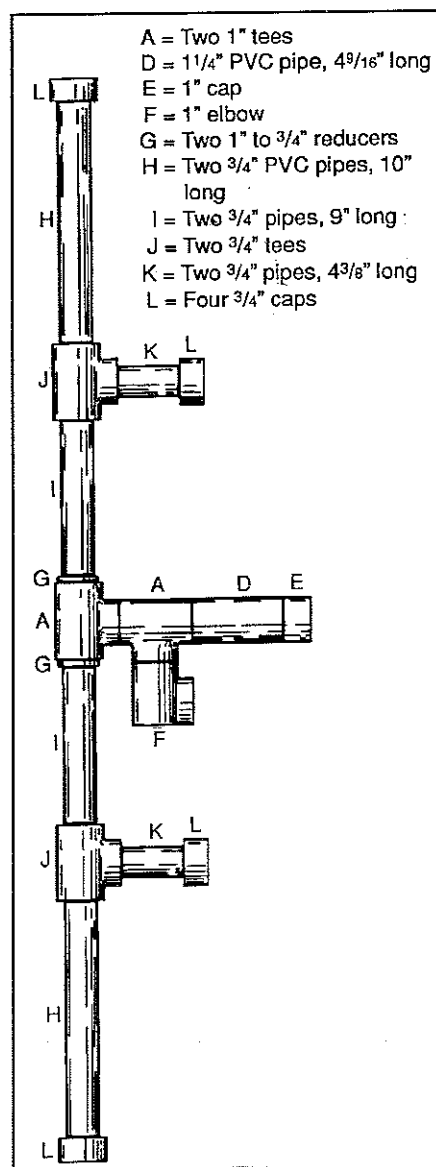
PVC parts list and layout for the four-element collinear enclosure. See fig. 6 for details on parts A through G.
